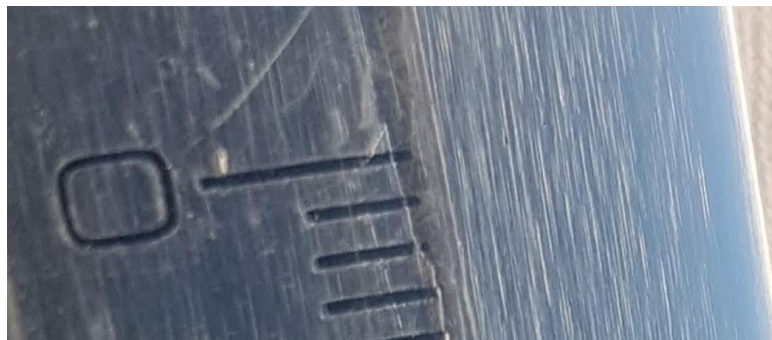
Location where the crack initiated was at the location of the defects in the base material.
